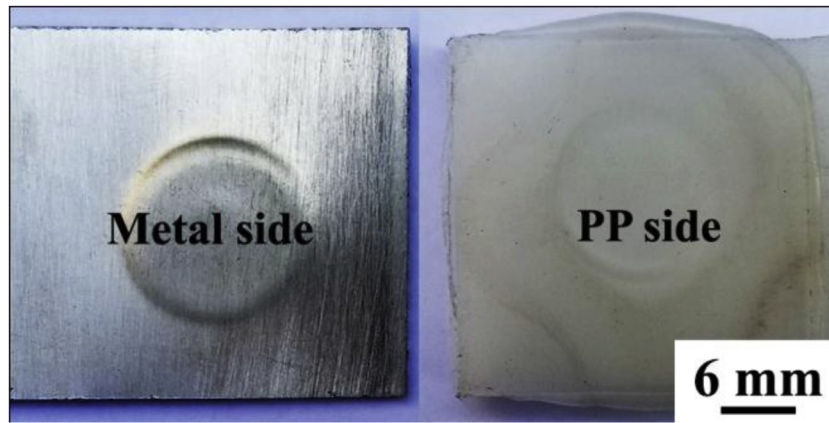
Typical surface morphologies with separation directly after friction stir spot welding of 5182 Al alloy and PP using a tool without a pin.
